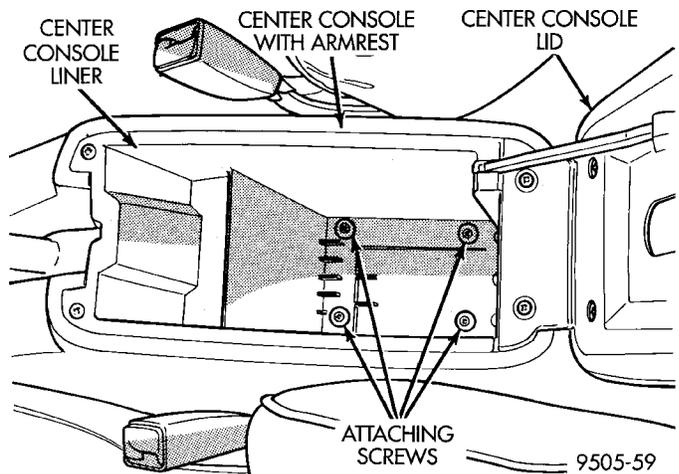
Attaching Screws At Rear Of Center Console With Arm Rest
